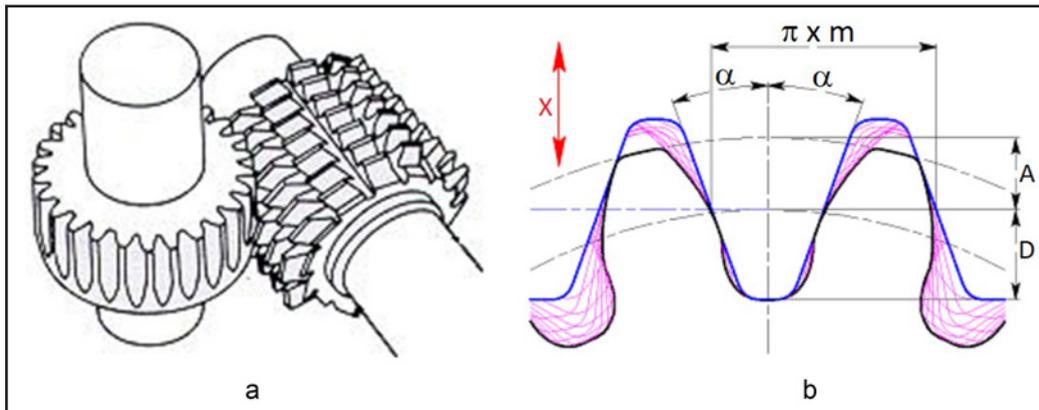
a – metal gear hobbing; b – definition of the gear profile by rack generation; m – module;  $\alpha$  – rack profile (pressure) angle; A – gear tooth addendum; D – gear tooth dedendum; X – addendum modification or X-shift.
